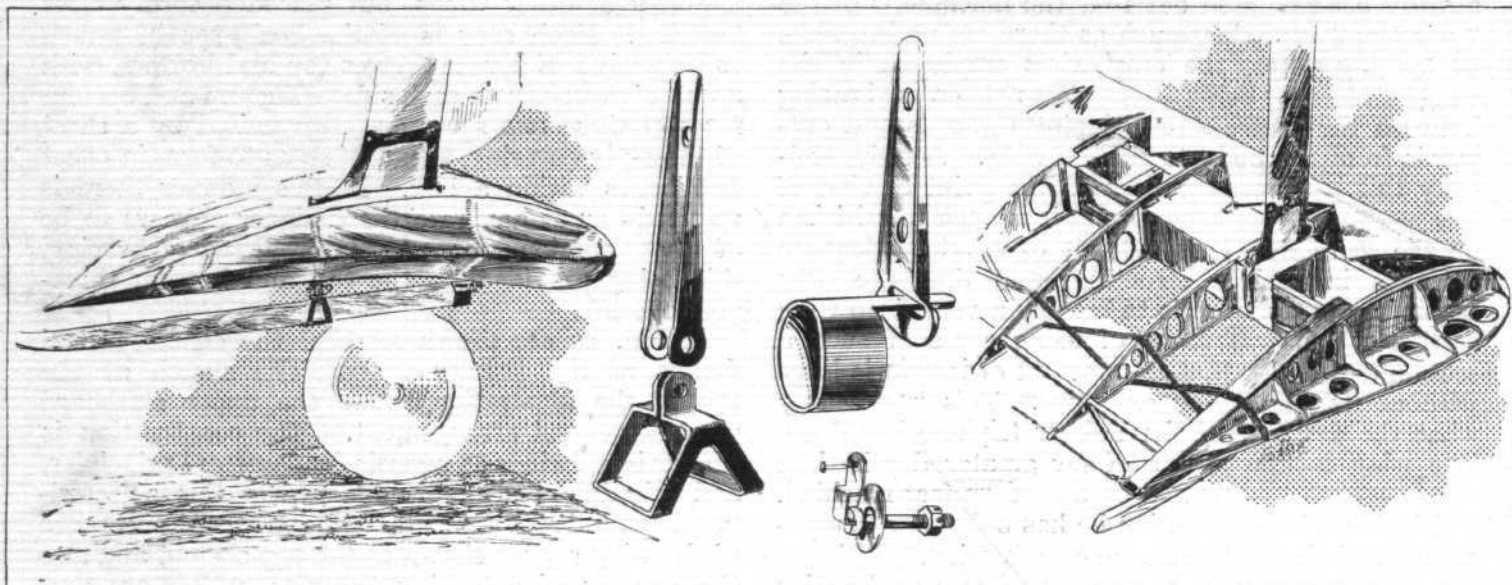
Details of the wing tip and its skid on the Fokker triplane.
